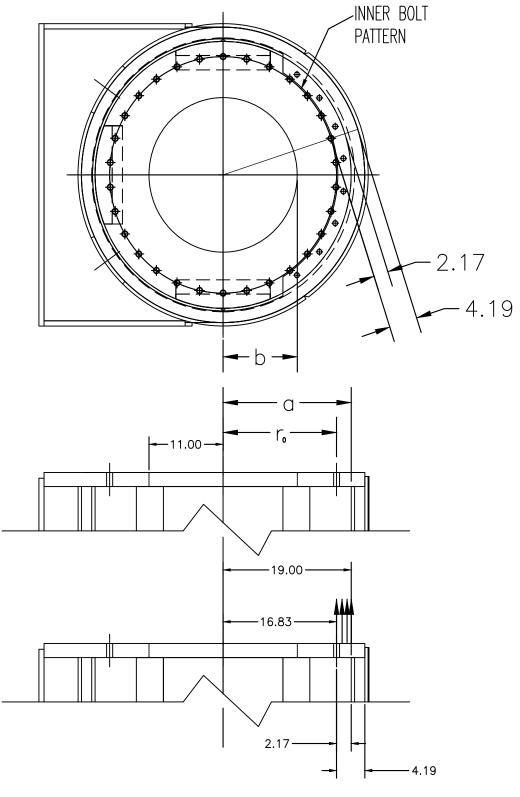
TOP PLATE BOLT LOADS SECT BA2.0
